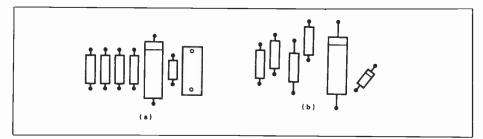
Component spacing and layout. The right way (a), and the wrong (b).
